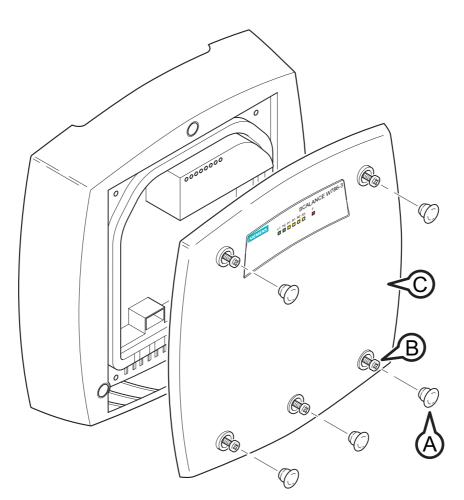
Removing the cover A Sealing cap B Cover screw C Housing cover
